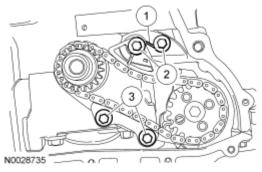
Locating Tensioner Shoulder Bolts, Tensioner Spring And Guide Courtesy of FORD MOTOR CO.
